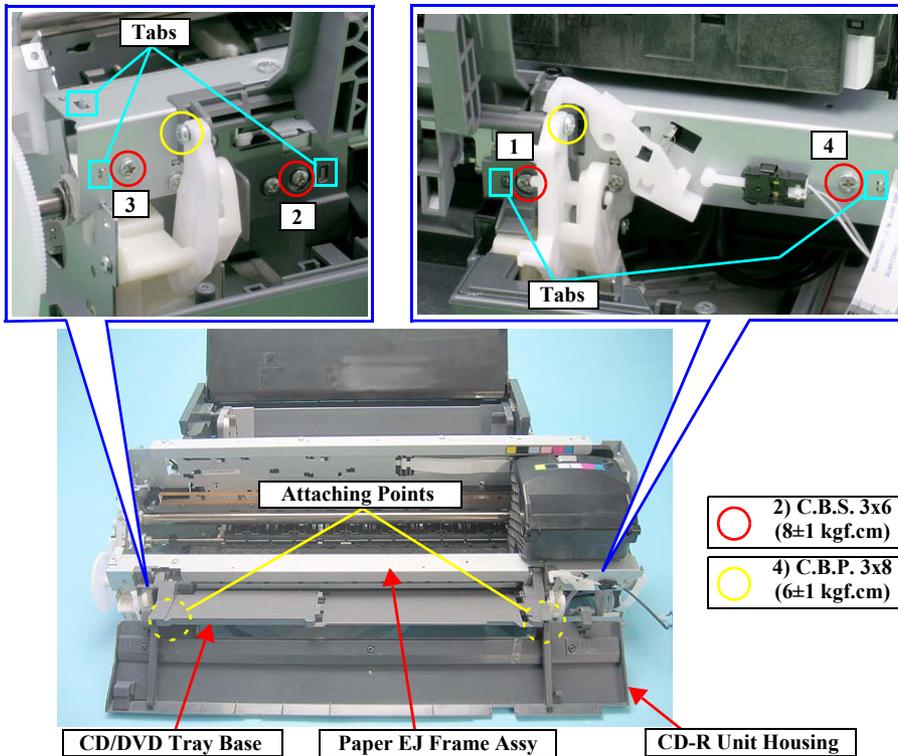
Screws that Secure the Paper EJ Frame Assy
